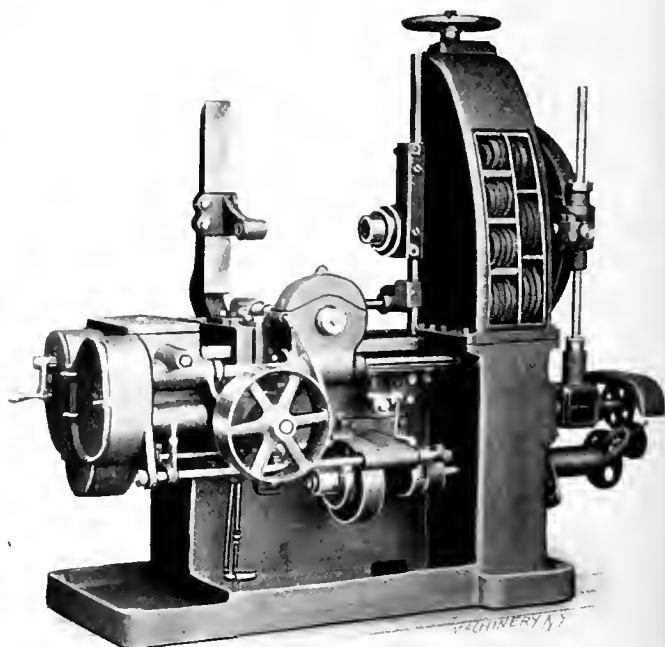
Rear View of Cincinnati Gear-cutter, showing Driving Mechanism.
